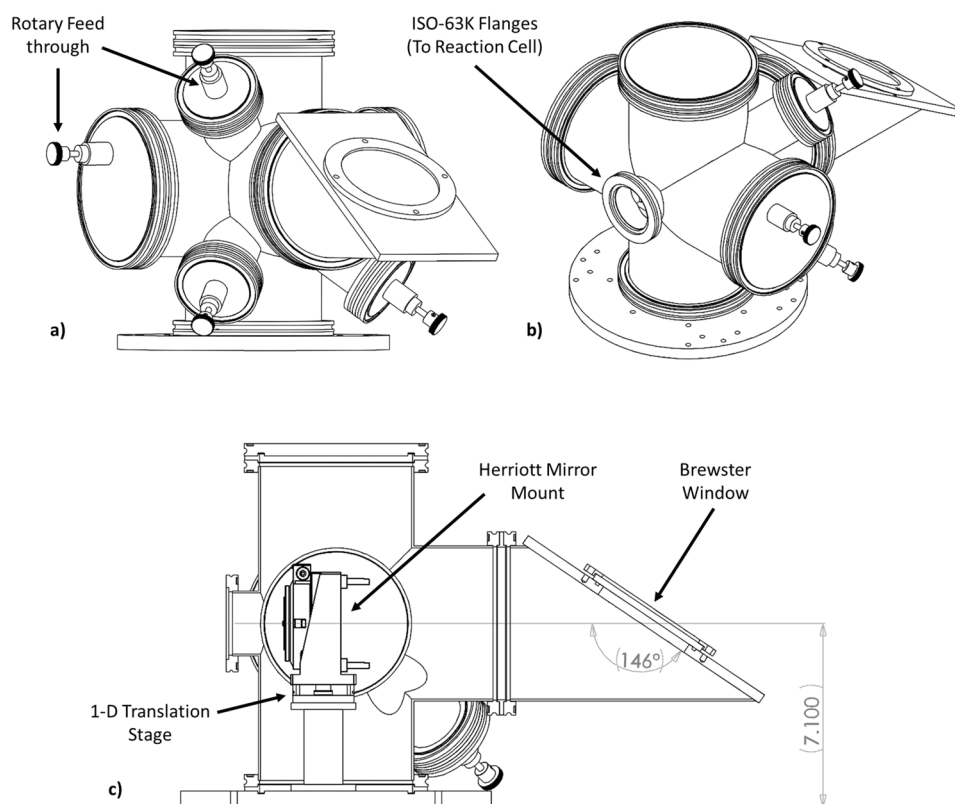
Custom Herriott cross assembly with semi-custom Herriott mirror mounts inside shown from (a) the side furthest from the vacuum chamber, (b) the side close to the vacuum chamber, and (c) in cross sectional view with relevant dimensions shown (in inches).
